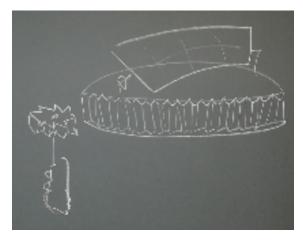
Electrical engine with gearing for rotating one module of panels
